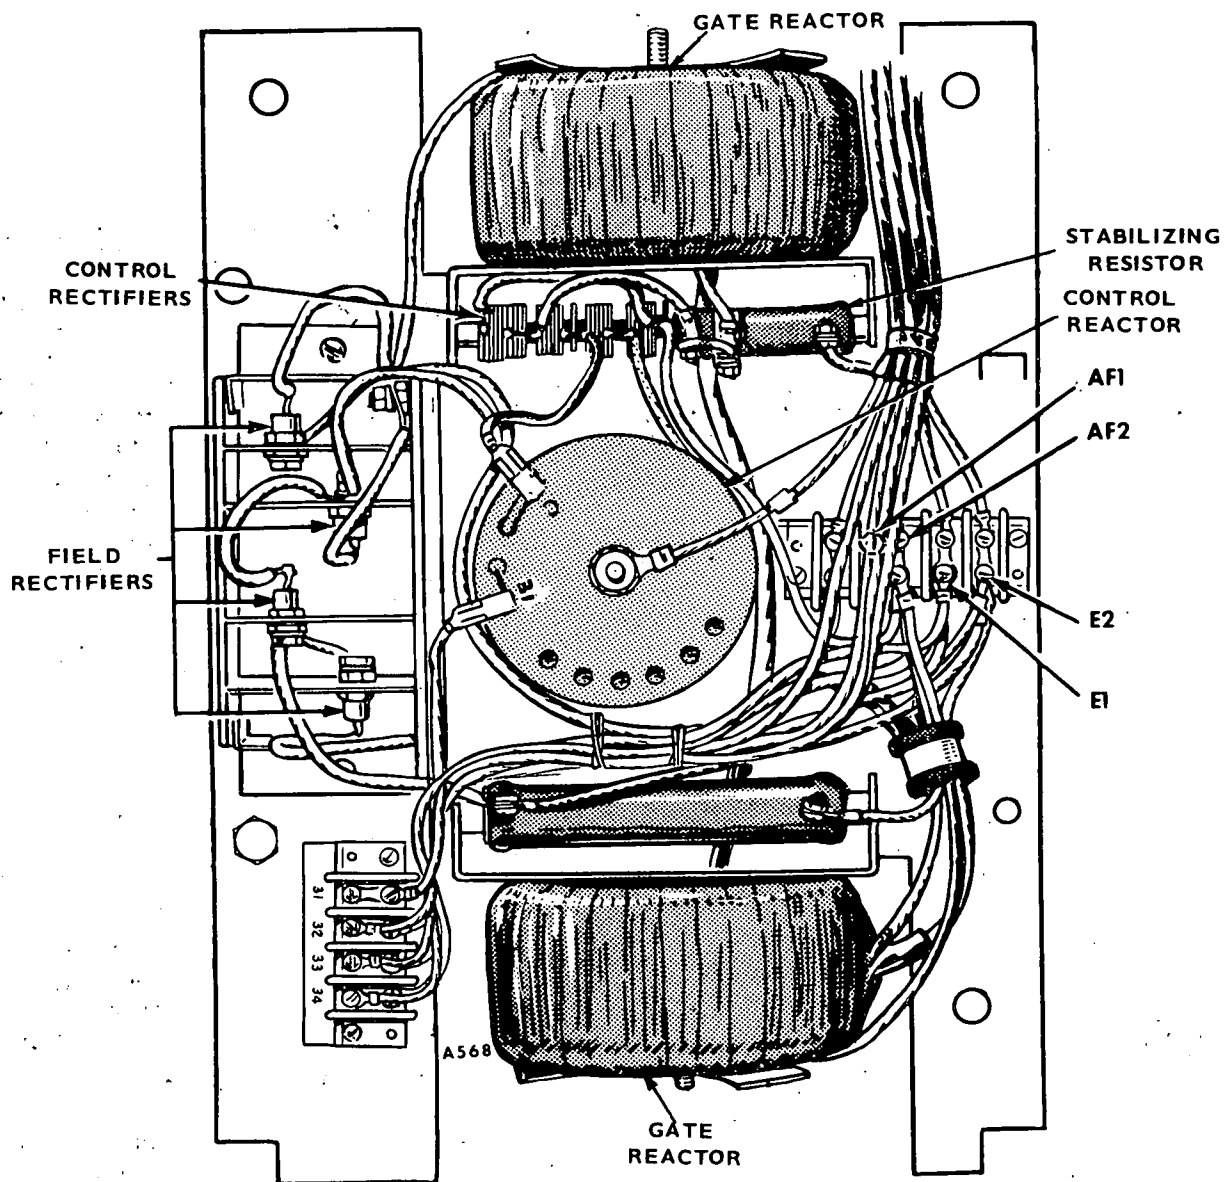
STATIC EXCITER ASSEMBLY (COVER REMOVED).
